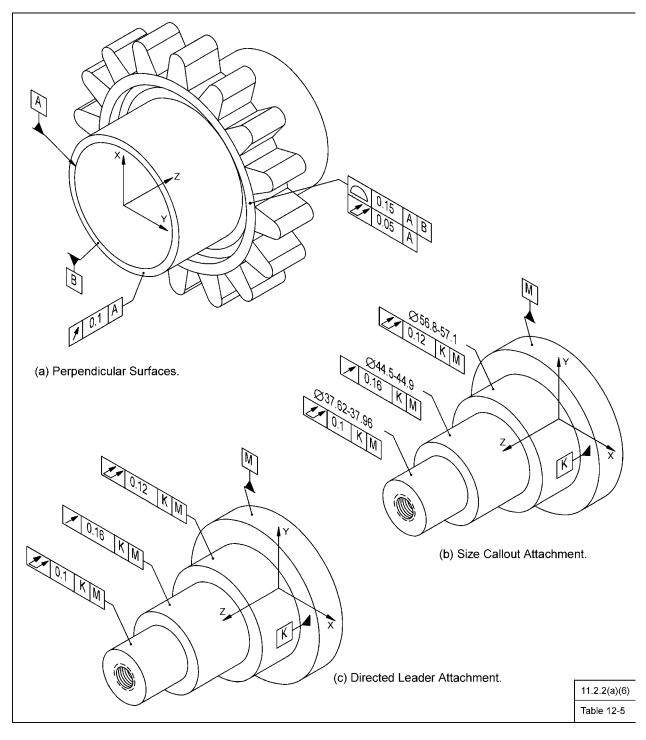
Runout – Perpendicular and Cylindrical Surfaces
